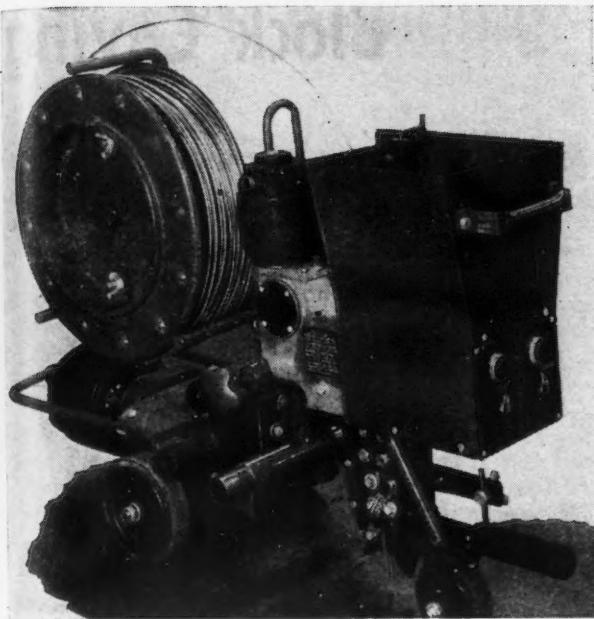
Carriage type Lincolnweld mounted on overhead beam.
